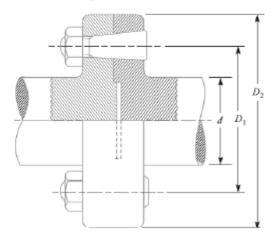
Solid Flange Coupling or Marine Type flange coupling.
